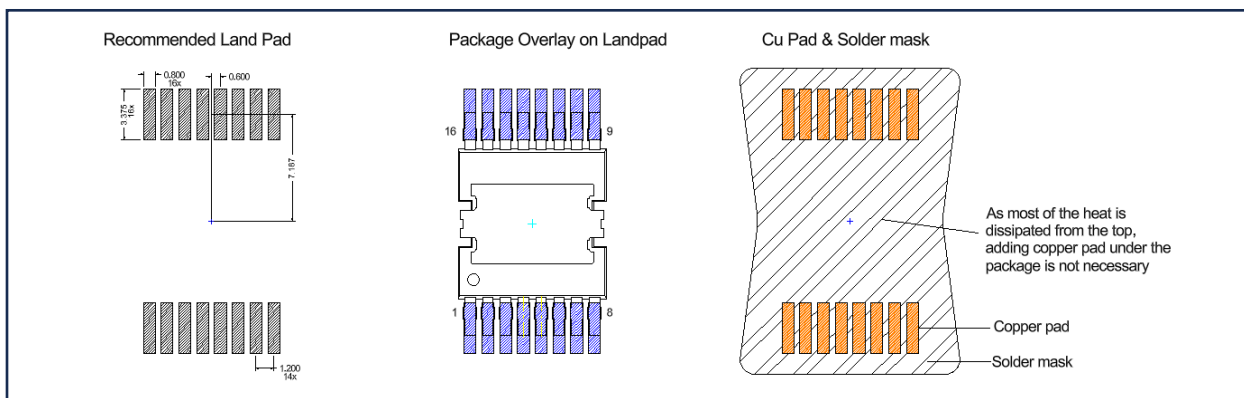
Recommended Land Pad Layout (without Cu pad under the package)
